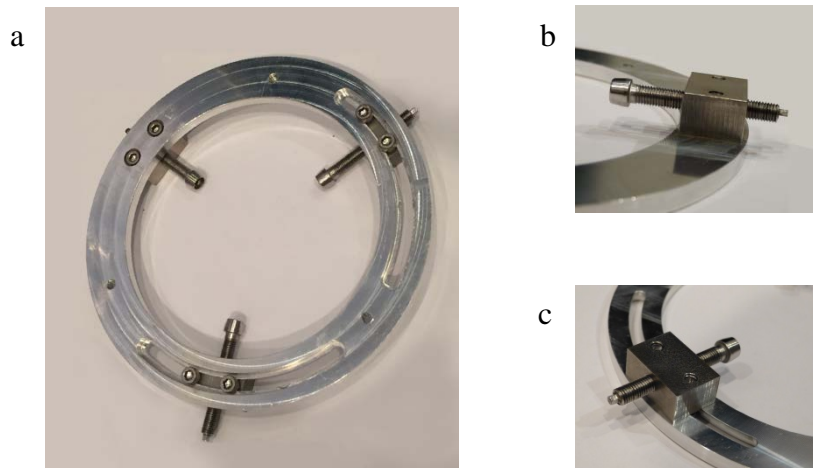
Halo and offset posts. a) Halo with offset posts and holder attachment holes. b) Fixed front offset post. c) Sliding side offset post.
